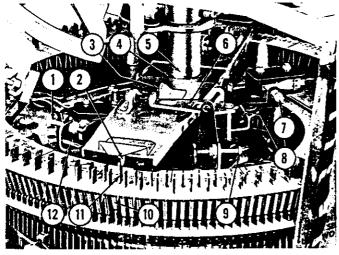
SELECTOR CRANK AND CARRIAGE SWITCH SETTINGS
